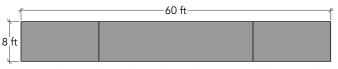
Plates are butted together, and two CJP welds are made connecting all three plates into a single 8-ft \times 60-ft plate.
